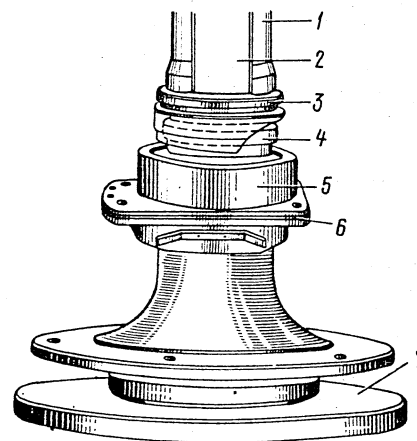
Driving in the Axle Shaft Bearing Locking Ring:
